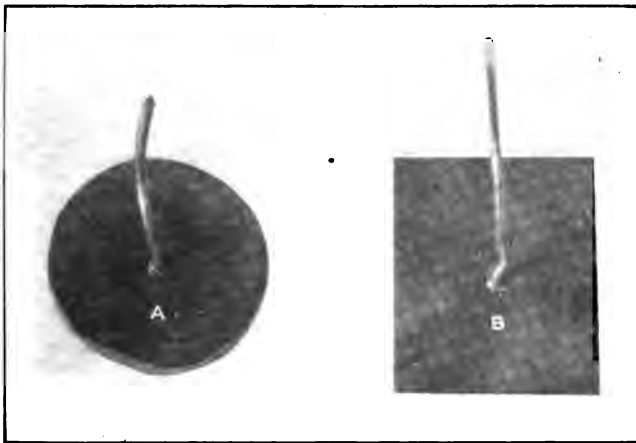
Examples of Butt-welding Operations performed by Percussive Electric Welding Apparatus
